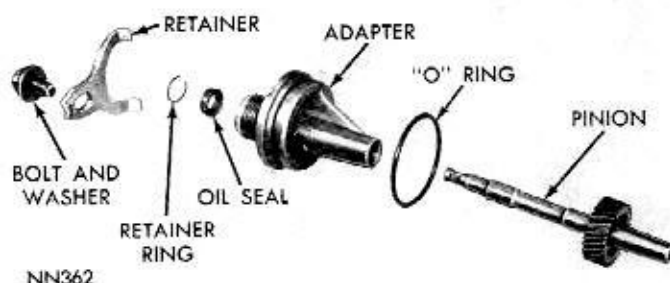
Speedometer Pinion and Adapter—Disassembled
